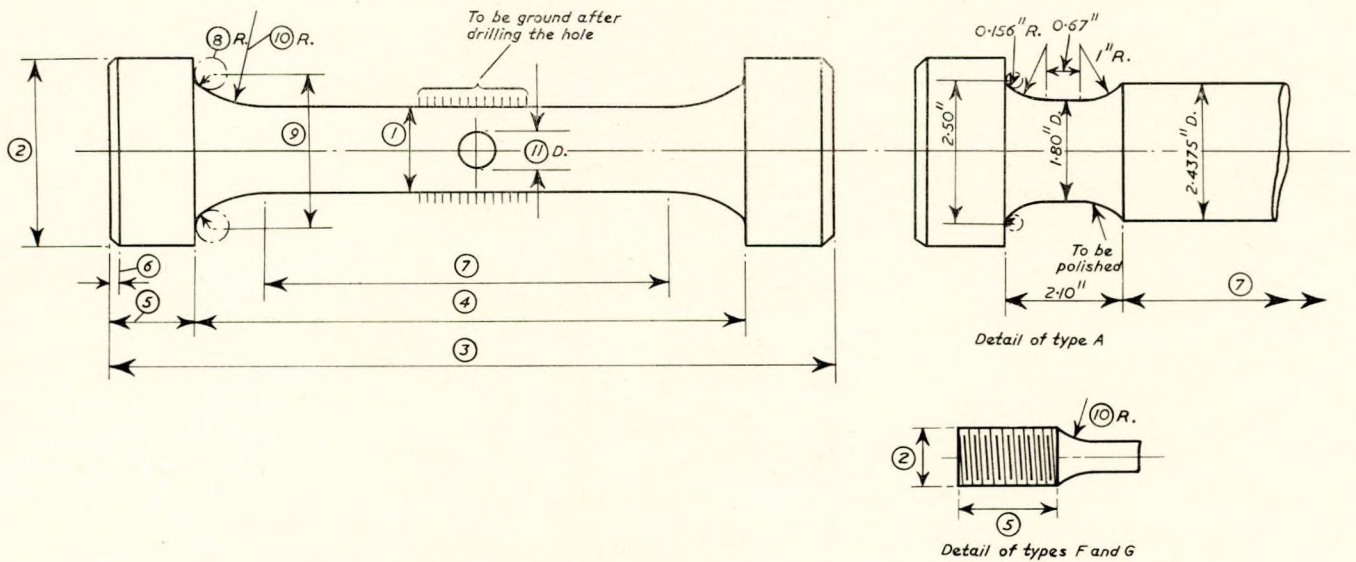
Transverse hole fatigue specimens for direct stress machines
